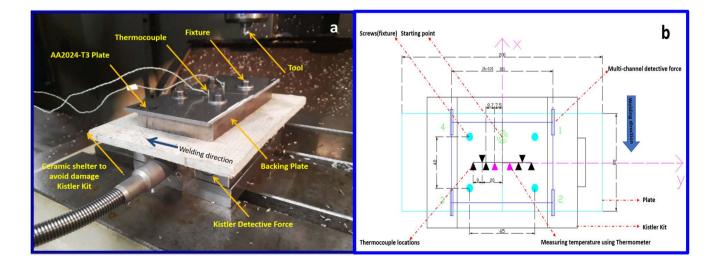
(a) Photograph and (b) schematic of plates, fixture, detective force, and thermocouples used in the FSW process
